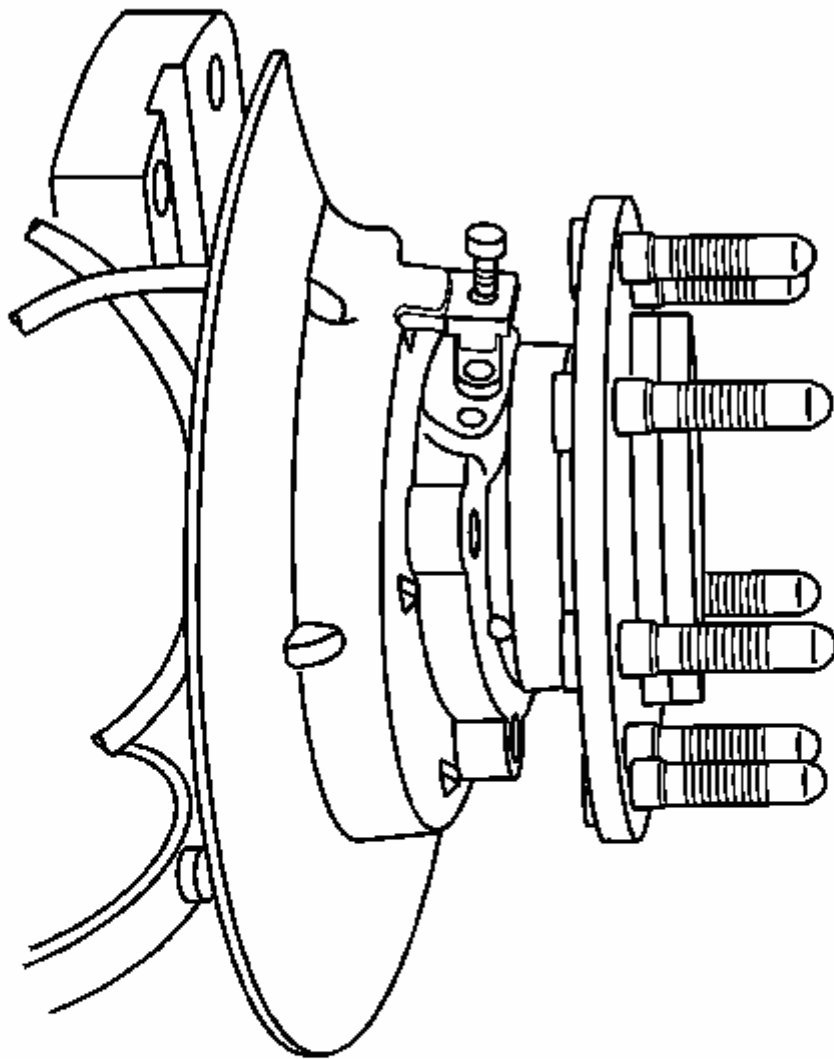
View Of Wheel Speed Sensor Mounting Bolt
